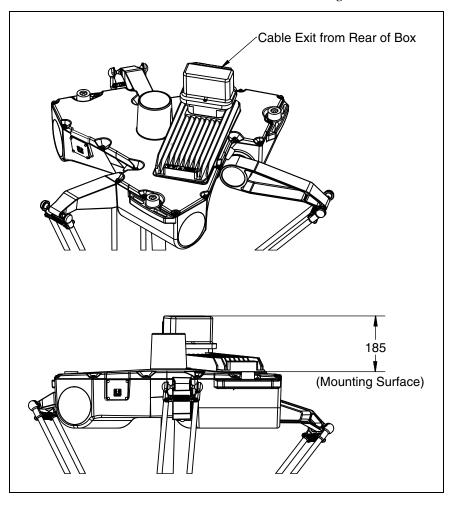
Cable Inlet Box Mounted on a Hornet 565
